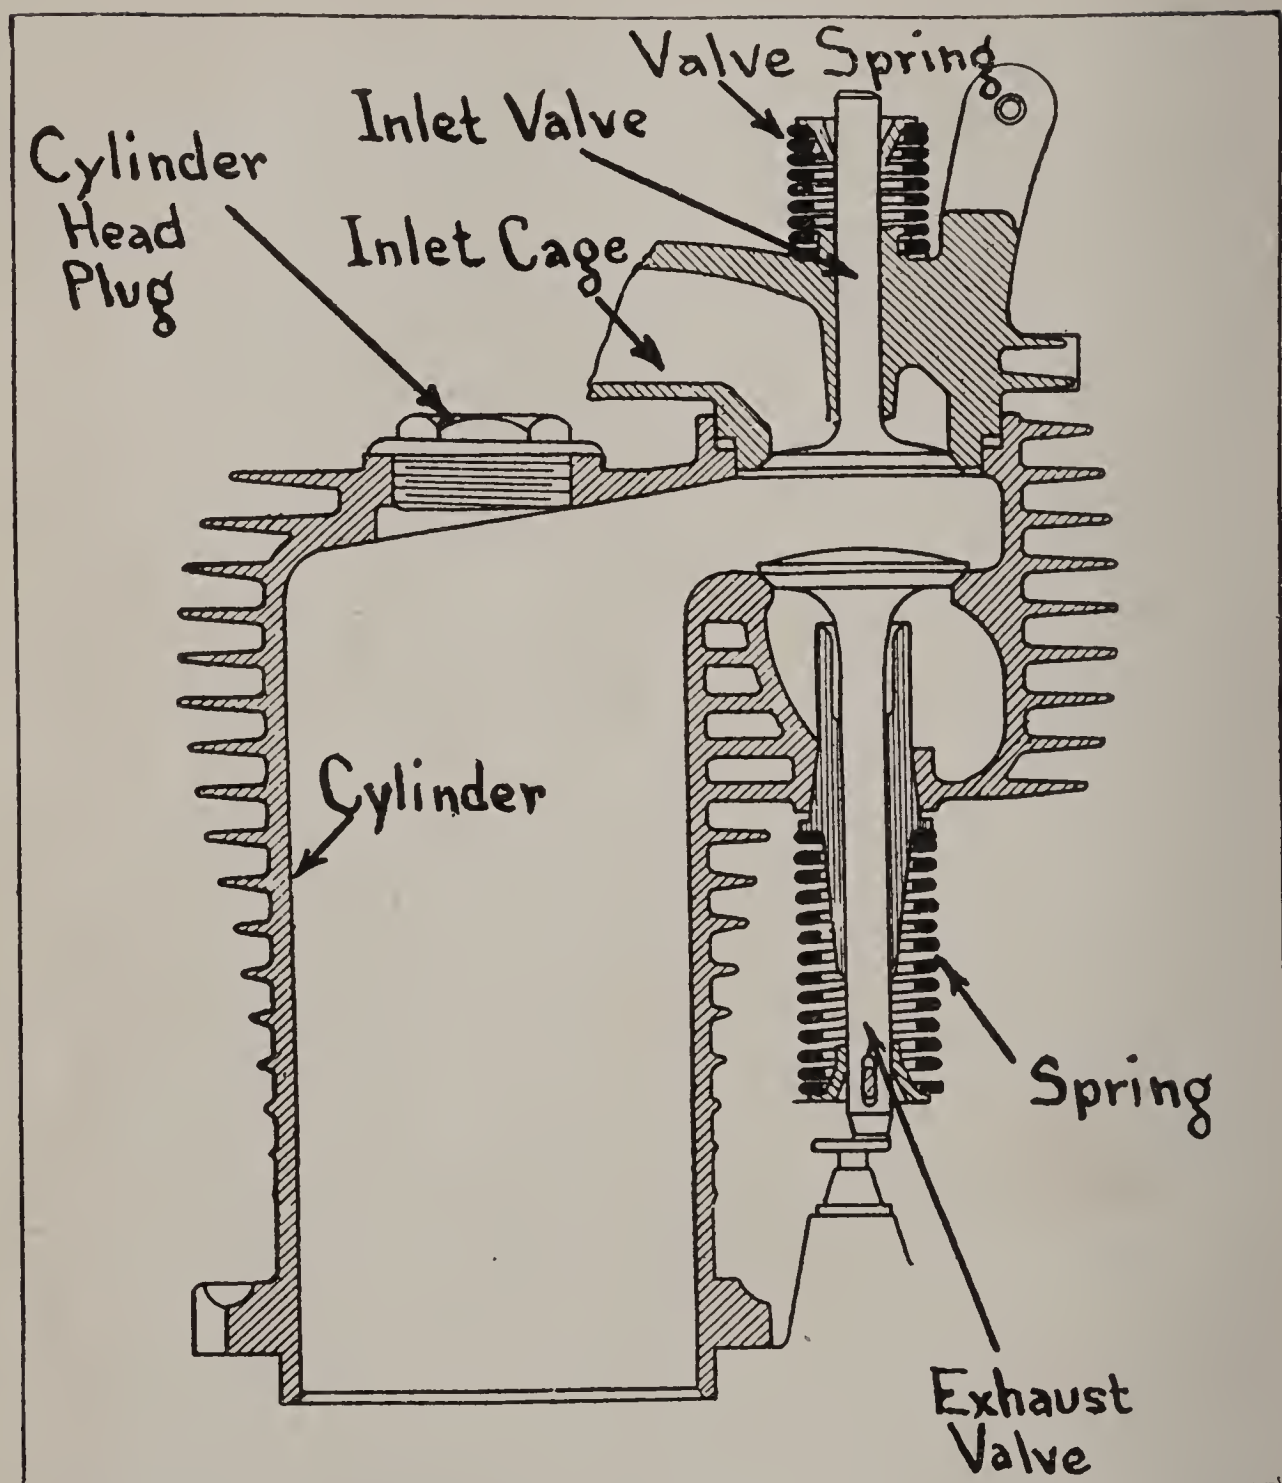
One-Piece Motorcycle Cylinder, Showing the Valve Arrangement Generally Employed.
